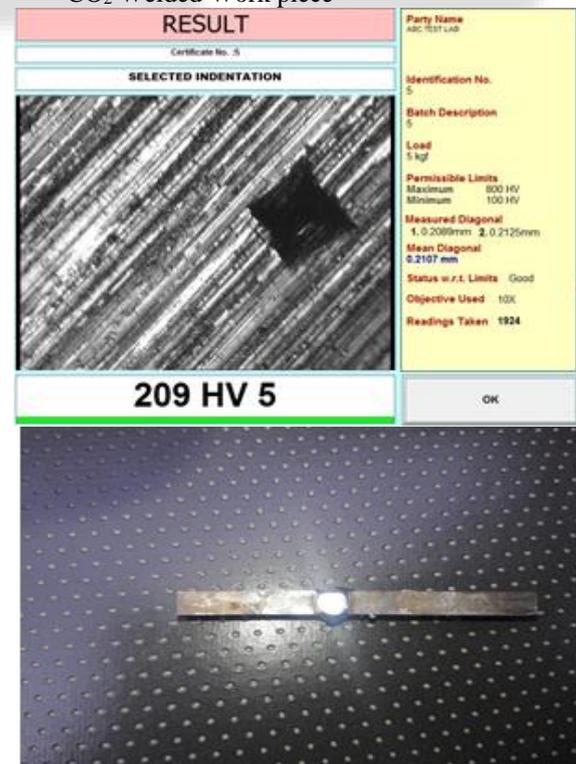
, 6: CO<sub>2</sub> welded work piece
